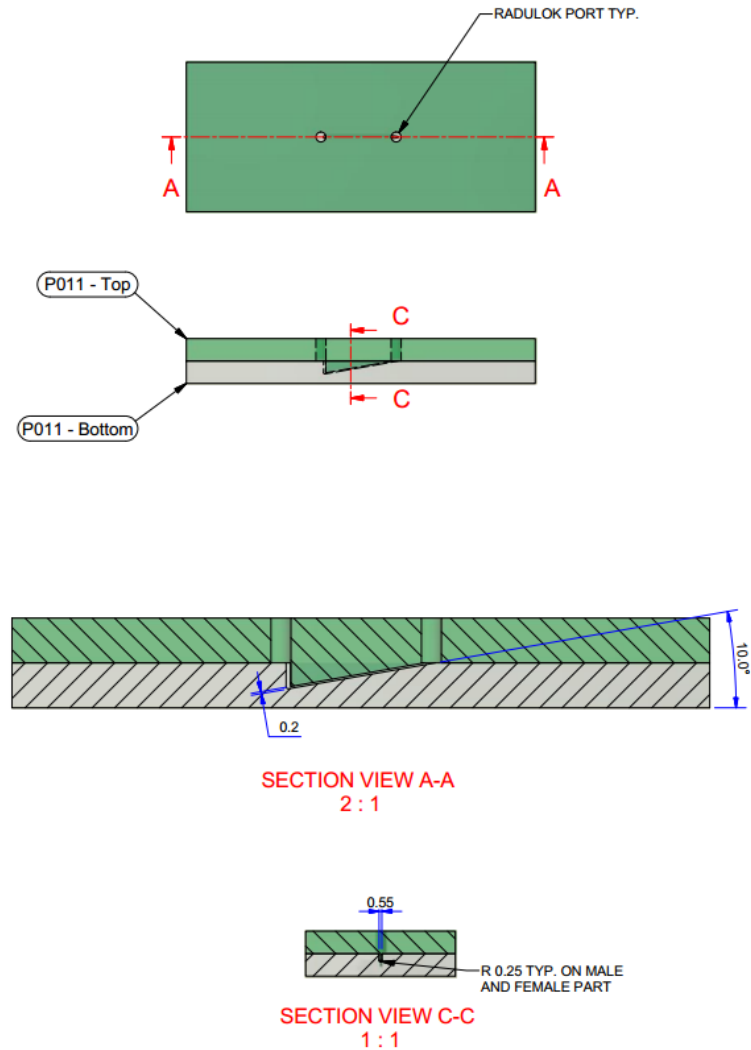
, Tilted channel CAD design (CAD drawings produced by Mark Cherill).
